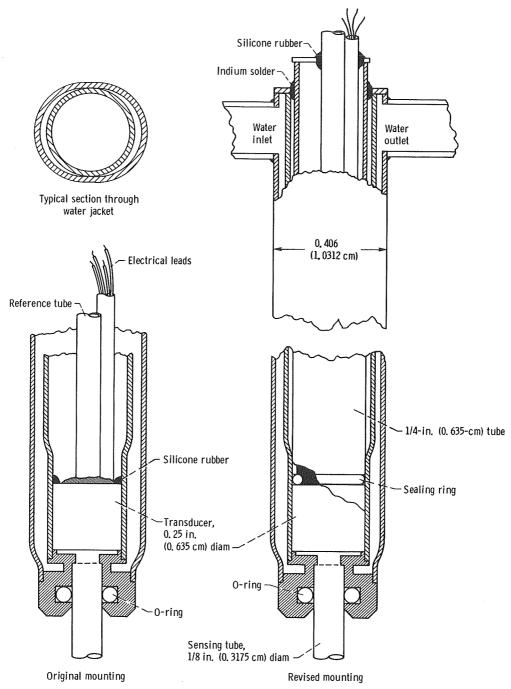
Cooling jacket mounting for 0, 25-inch- (0, 635-cm-) diameter transducer.
